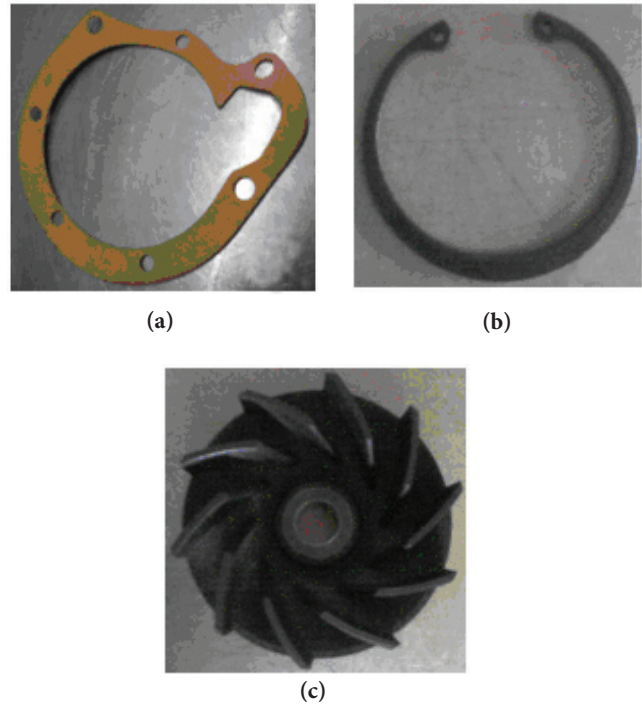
Images of. (a) Mechanical gasket. (b) Circlips. (c) Impeller in water pump.
